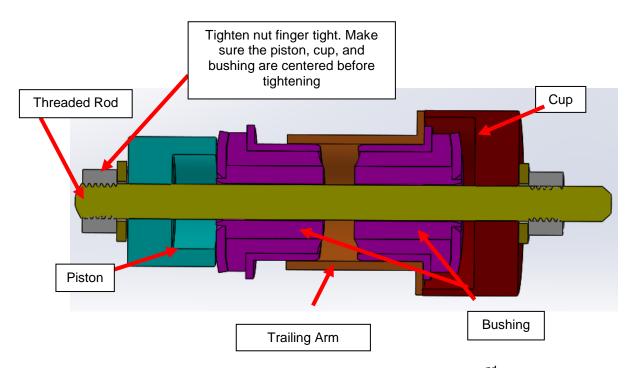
Installation Tool and Bushing/Installation of 2<sup>nd</sup> bushing
